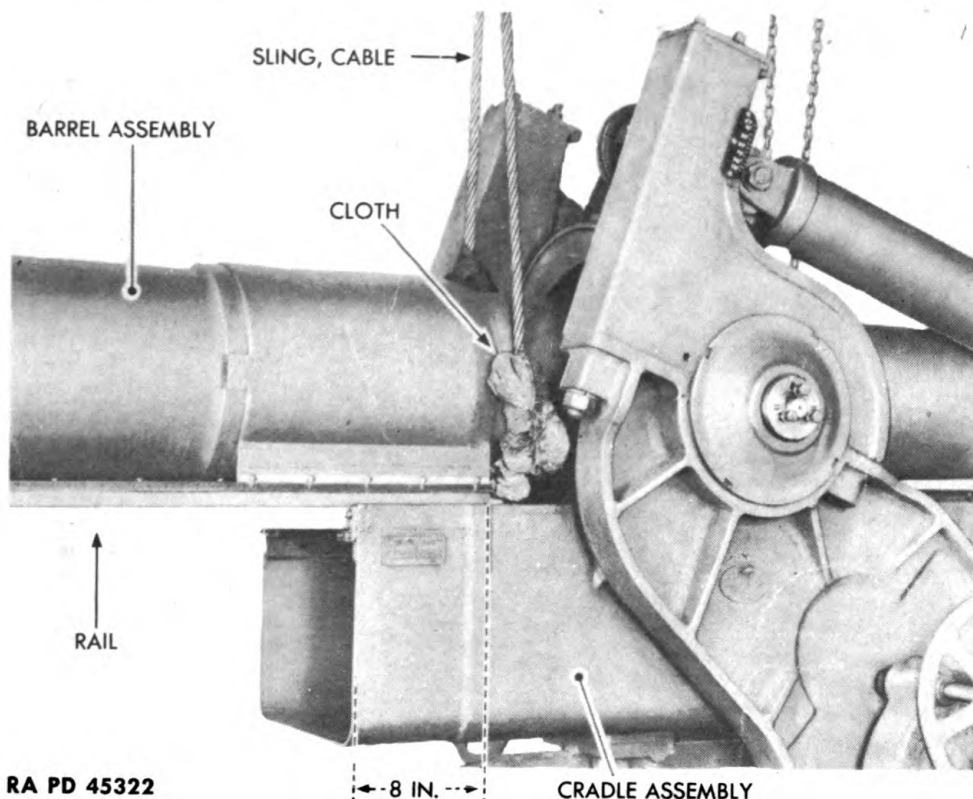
Removing Howitzer Barrel Assembly (Step C)
